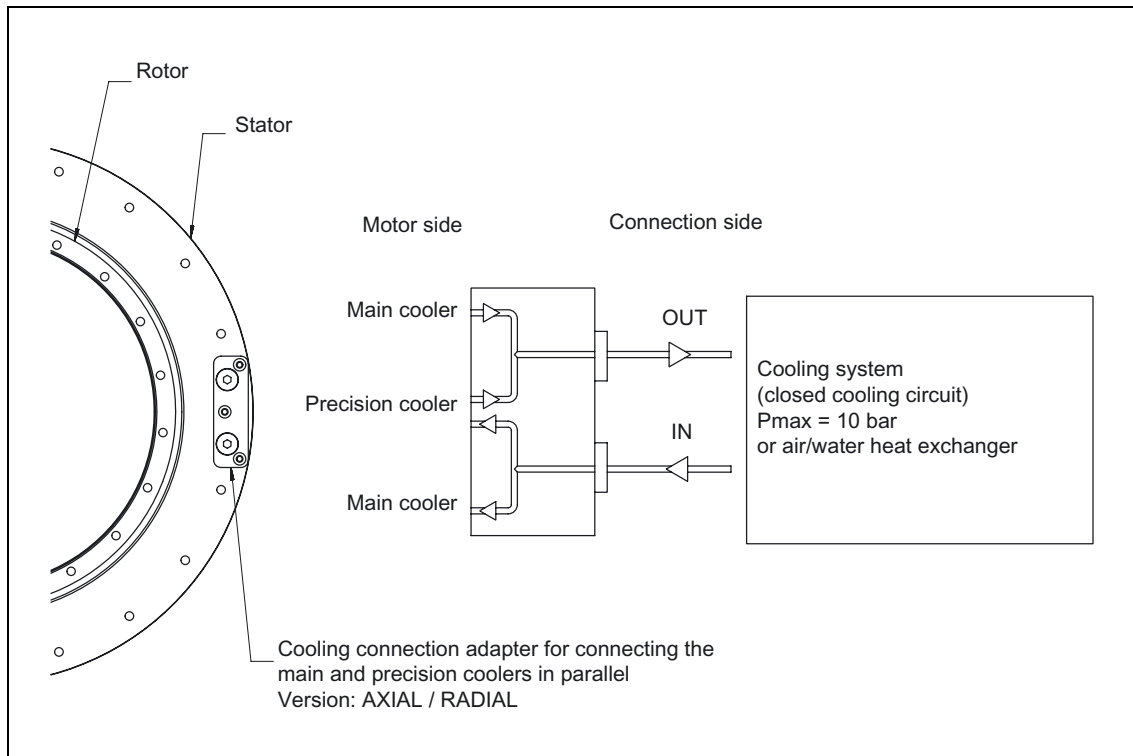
Cooling connection adapter for connecting the main cooler and precision coolers in parallel for 1FW6160, 1FW6190, 1FW6230 and 1FW6290
